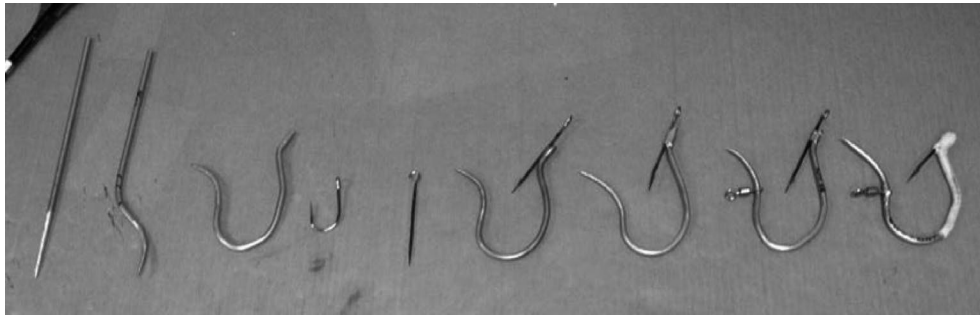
Steps in the construction of a handmade brass čibu-d. Photo credit: R. Carlson.
